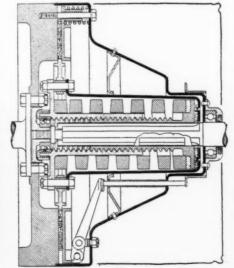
Motornex clutch, showing large helical spring that makes starting easy
